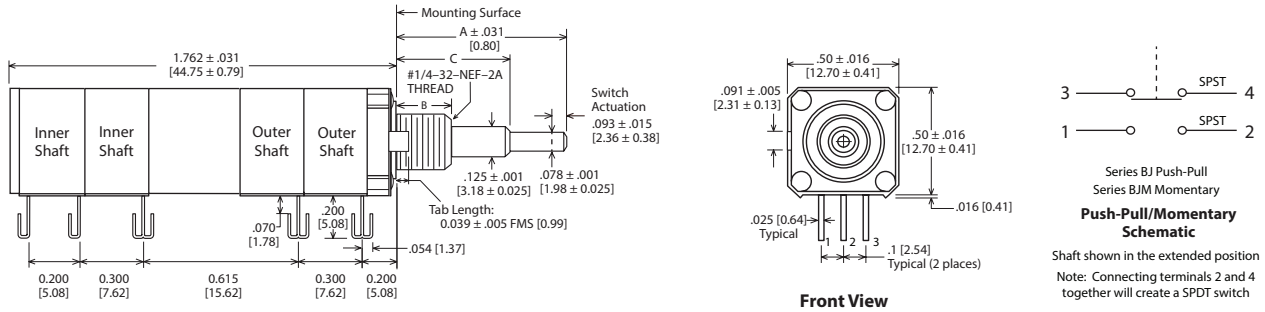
SHA13: Concentric Shafts, Solder Hook, 3 Potentiometer(s) or RS + MP, 1/4" Bushing
